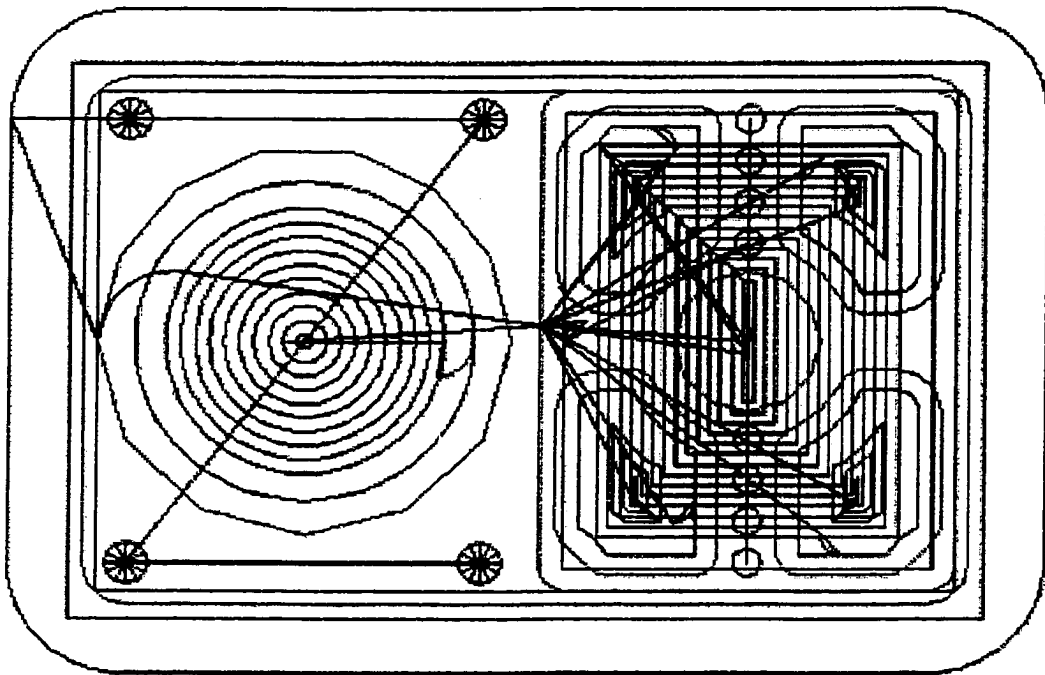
shows the example of tool paths generated from FACILE. For illustration purposes, the tool path is imposed on the finished part geometry.
